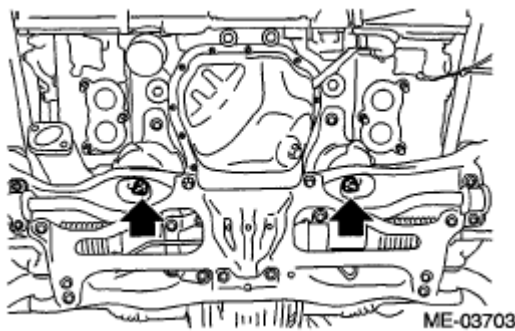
Locating Engine Mounting To Front Crossmember Nuts
